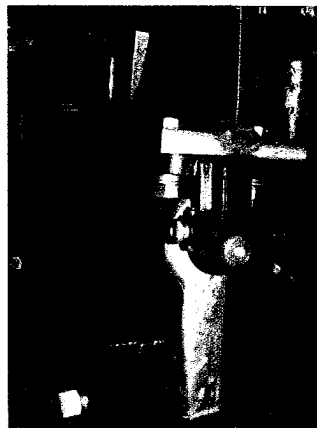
Thor dual ball pin tow-hitch installed in the testing machine
